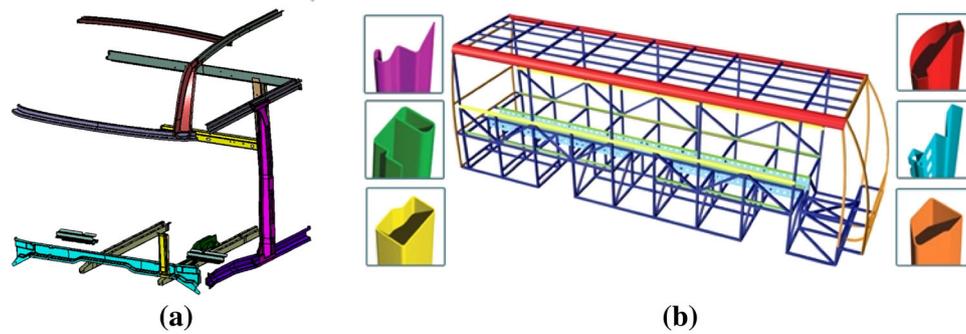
Profile-intensive designs for truck cabin (a) and bus body using open and closed profiles (b)
